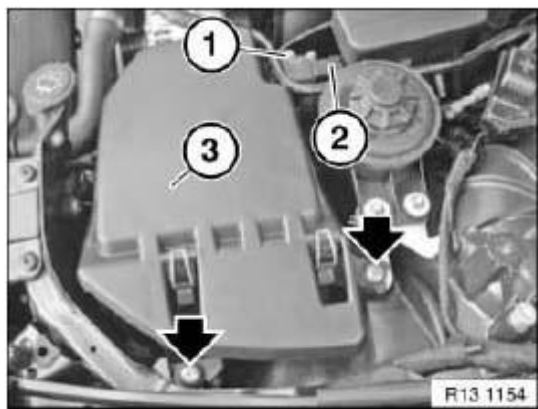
Identifying Plug And Filter Housing (5-Series)
